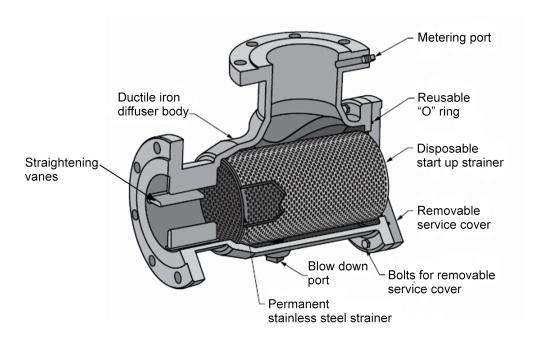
Suction guide for base-mounted pump. (Skilled Trades BC, 2021) Used with permission.
